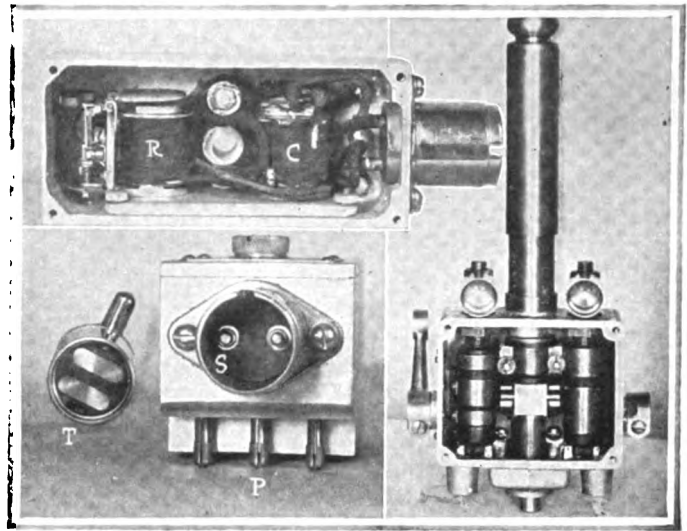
Left—Interior and end views of the Bijur regulator which is connected to the outer circuits by a change over plug T. Right—Plunger type of starting switch with barrel contacts
